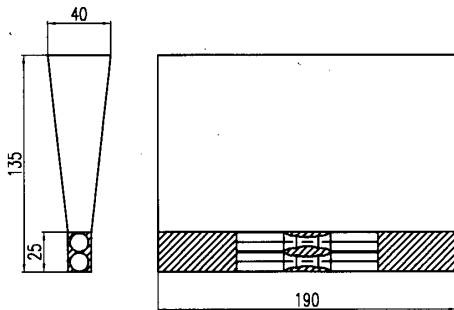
Schematic illustration of wedge casting from which fatigue specimens were sampled
